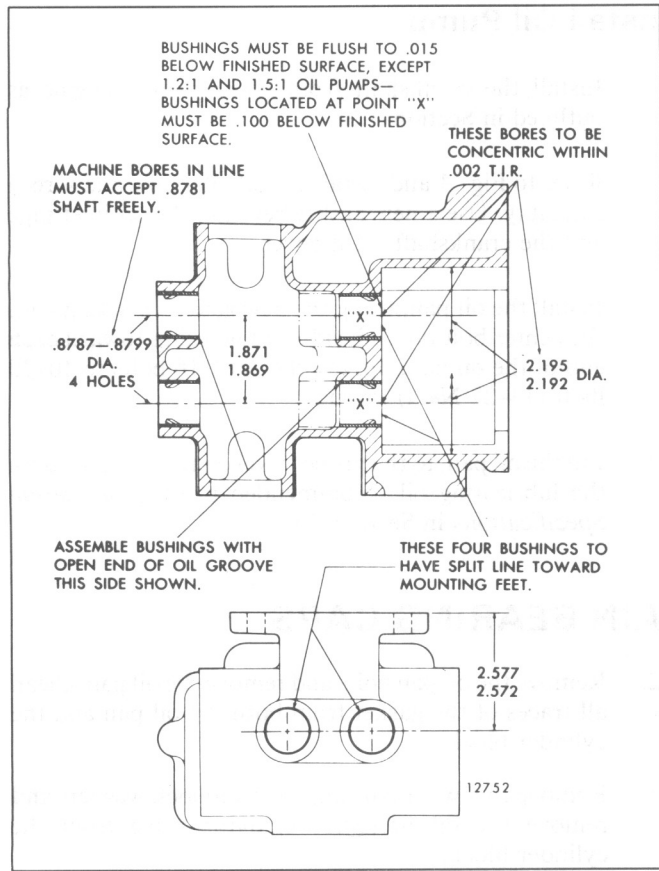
Diameter and Location of Bushing in Oil Pump (6V-92 and 8V-92 Engine)
